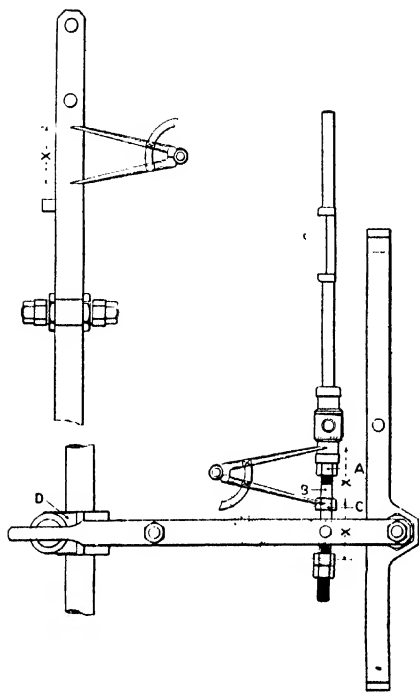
METHOD OF ADJUSTING LENGTH OF STROKE—WEIR DIRECT-ACTING PUMP
